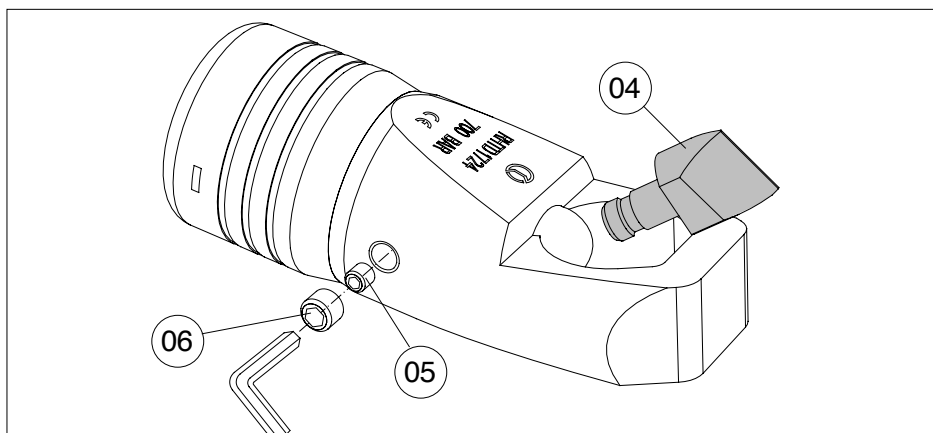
BLADE CHANGING - CHANGEMENT DE LA LAME - MESSERWECHSEL
